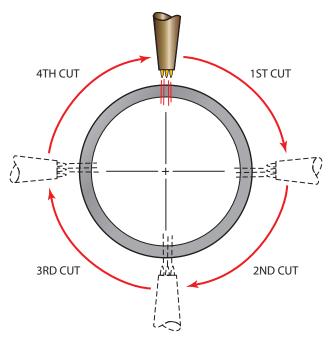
On large-diameter pipe, the torch is turned to keep it at a right angle to the pipe. The pipe should be cut as far as possible before stopping and turning it.
